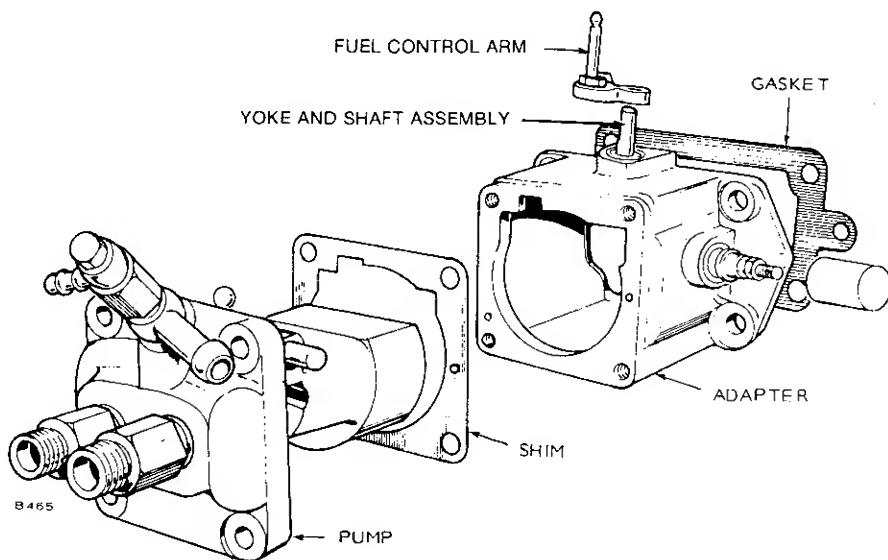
PUMP AND ADAPTER ASSEMBLY
